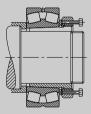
Dismounting of Withdrawal Sleeve by using Bolts
